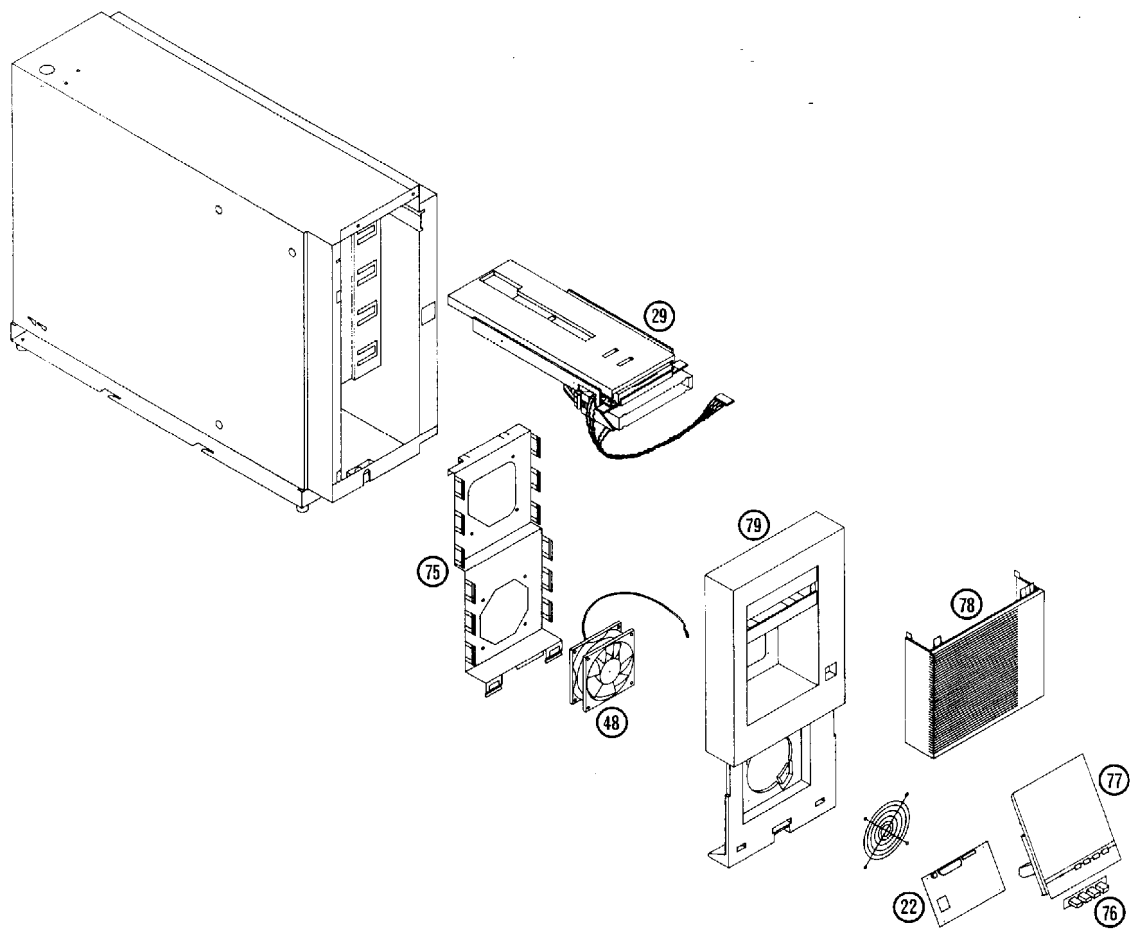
Optical Disk Library Exploded View (Sheet 3 of 3)
